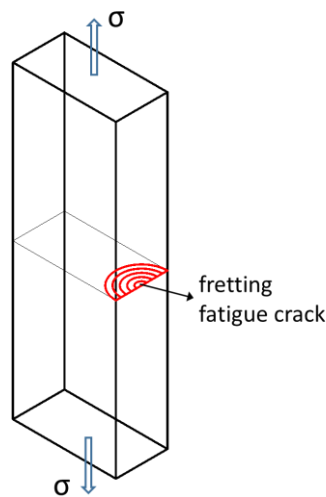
Semi-elliptical crack produced by fretting fatigue
